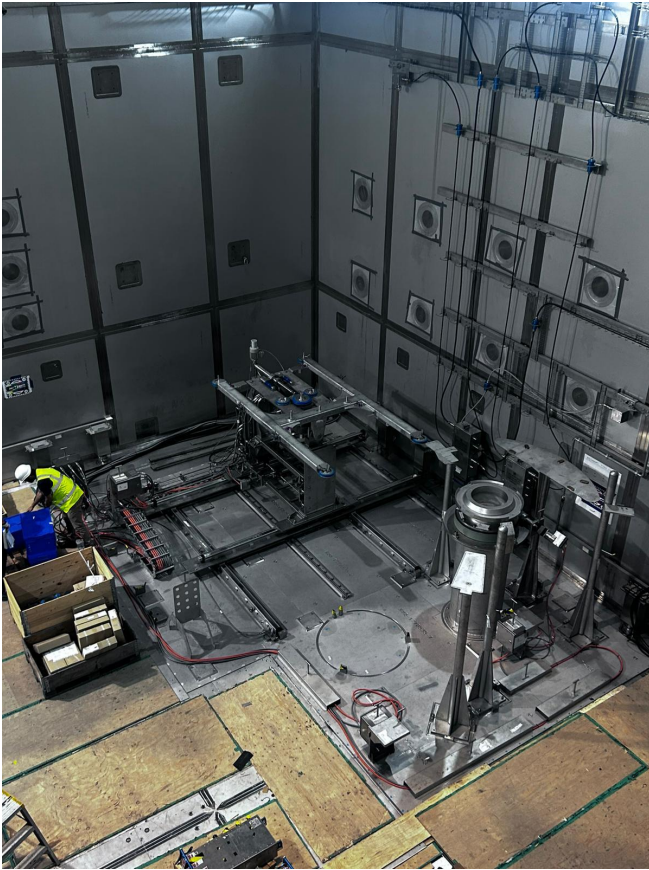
Picture of the machining station during installation within the Active Cells, showing the diamond wire saw (back) mounted on its cartesian motion platform. On the bottom right, the component support stand for the target wheel can be seen (with the MRP stand still to be installed). The component stands include rotational functionality for the components, adding another degree of freedom to allow for more intricate cutting.
